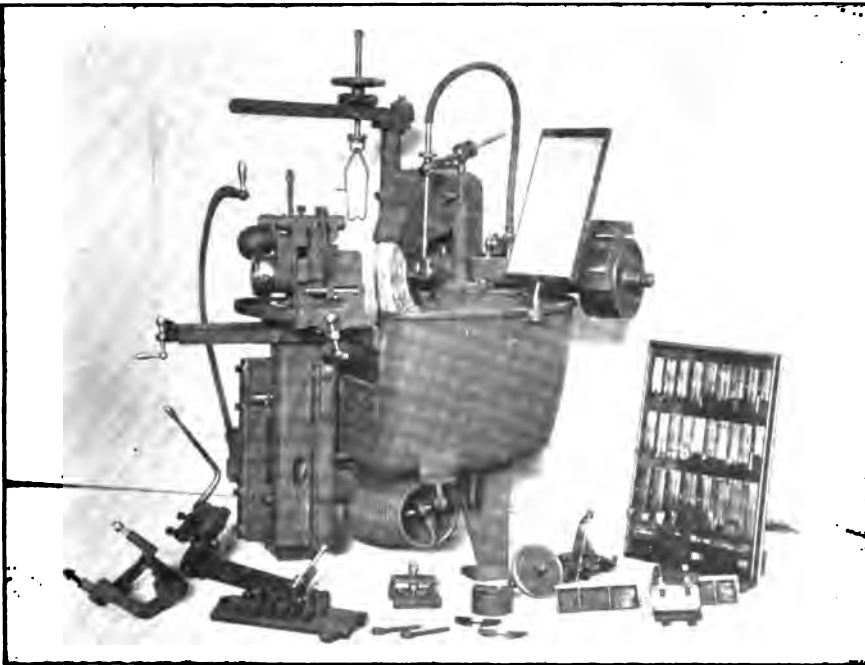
Sellers grinder for flat-face tools. The wheel with a V-shaped periphery has certain advantages.
